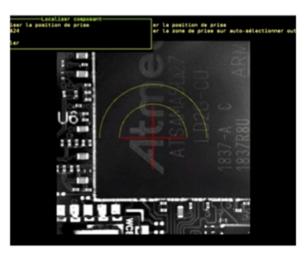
SAMA5D27 WLSOM Pick & Place Operator View
